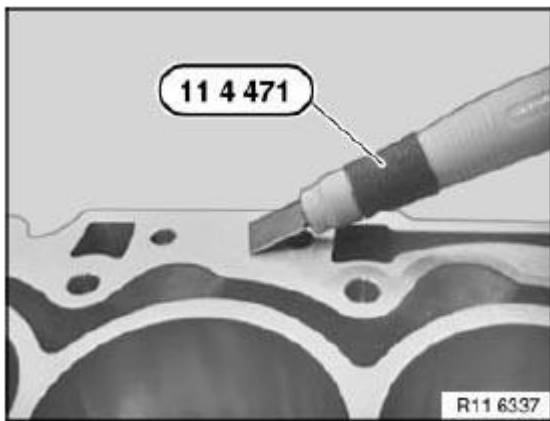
Removing Coarse Residues On Sealing Surfaces Using Special Tool 11 4 471
